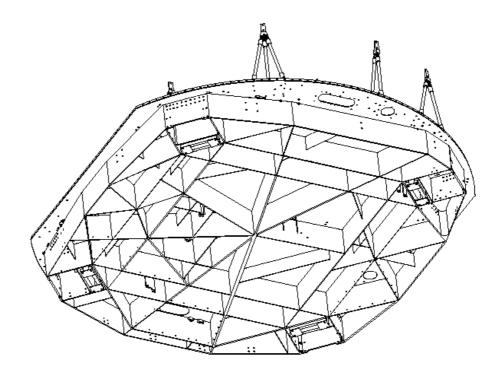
Overview of the Optical Bench Plate sub-assembly, rear side
